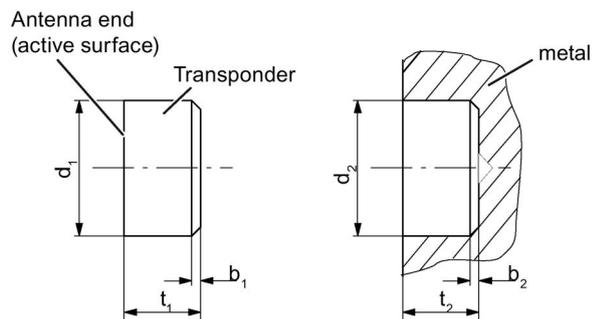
Flush-mounting of MDS D421/D521/E623 in metal with tools
